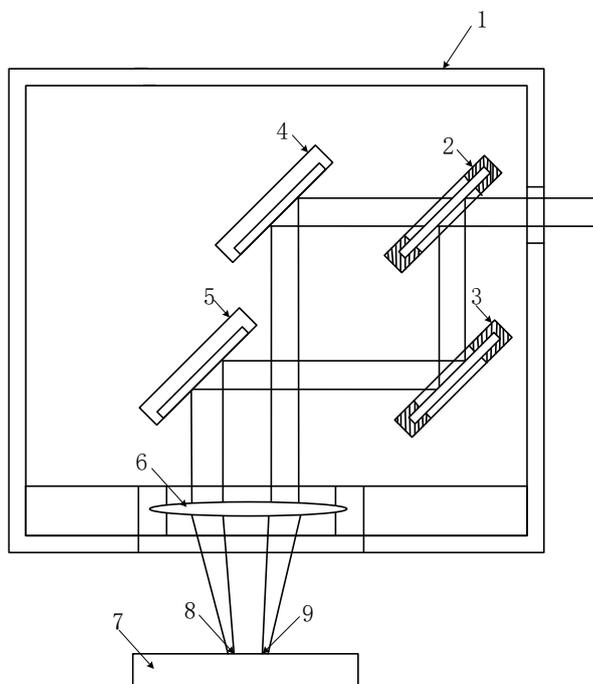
Structure of dual focus composite laser welding processing head
